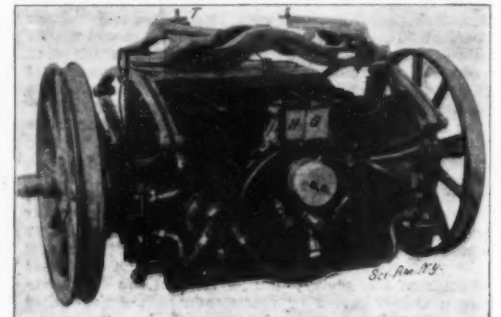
FRONT VIEW OF FORE-CARRIAGE.
